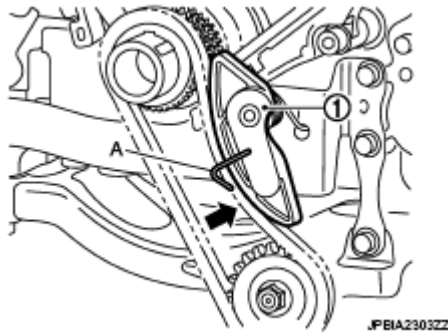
Identifying Stopper Pin And Oil Pump Drive Chain
